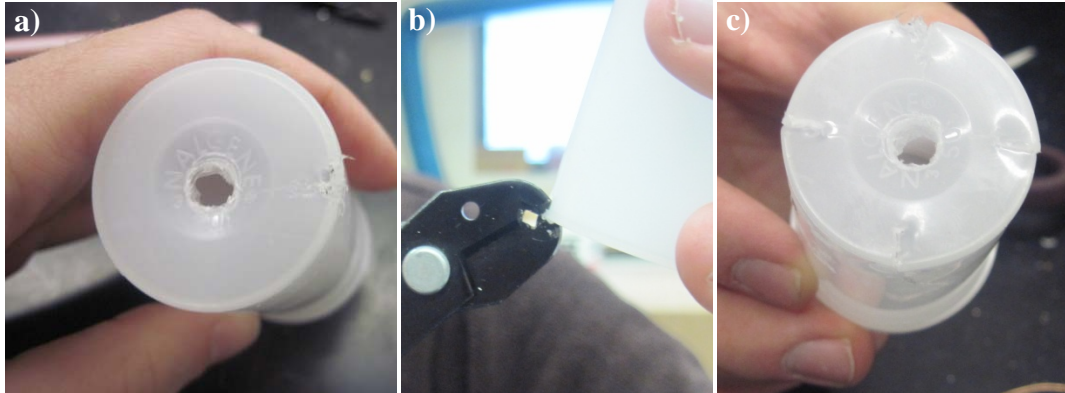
a) Step 1 – drilled pill bottle. b) and c) Step 2 – notches.
